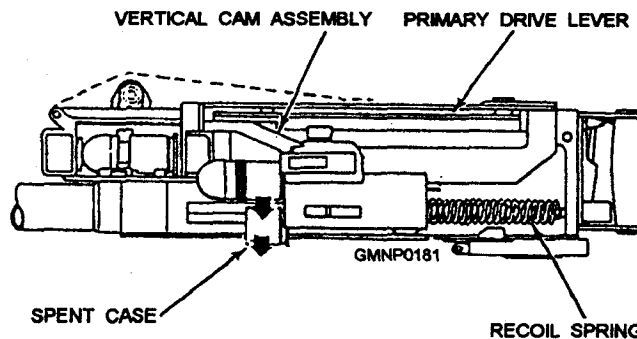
Mk 19 Mod 3 machine gun recoil and ejecting sequence.
